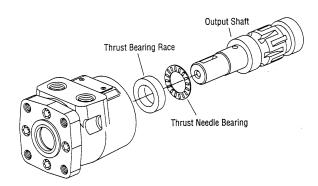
Swing Brake Assembly (Ausco) (Prior to S/N 0300064566)
